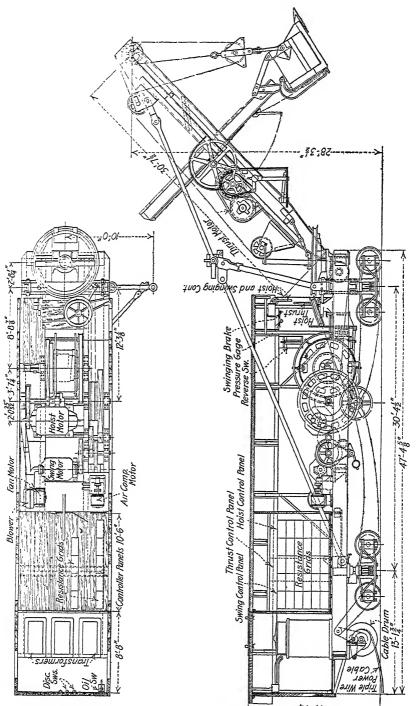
Shovel Equipped with Alternating-Current Motors.
